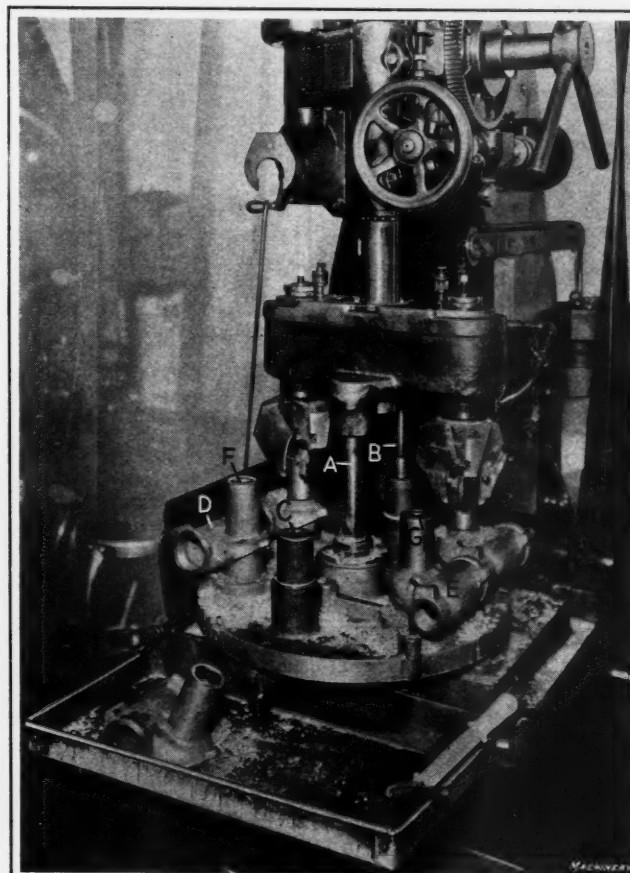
Baker Bros. High-duty Drilling Machine equipped with Indexing Fixture and Two-spindle Head for hollow-milling Steering-gear Housings
